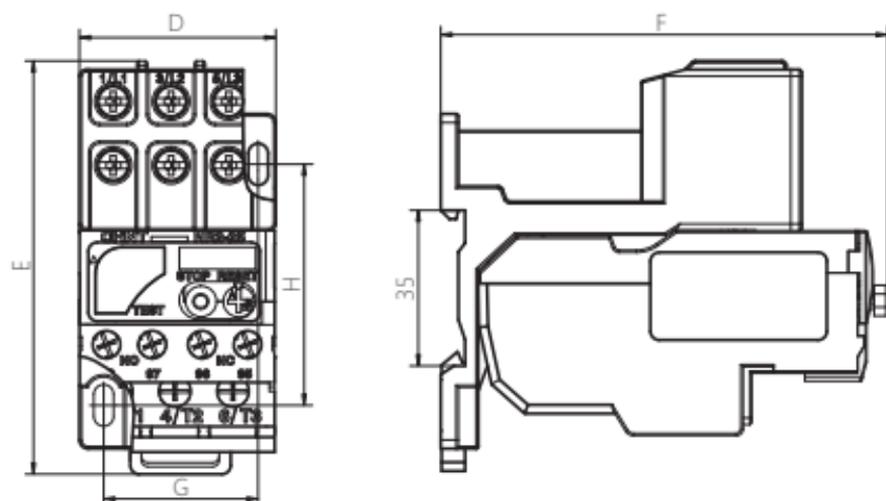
Outline dimensions of product with mounting base (NR2-11.5~93)
